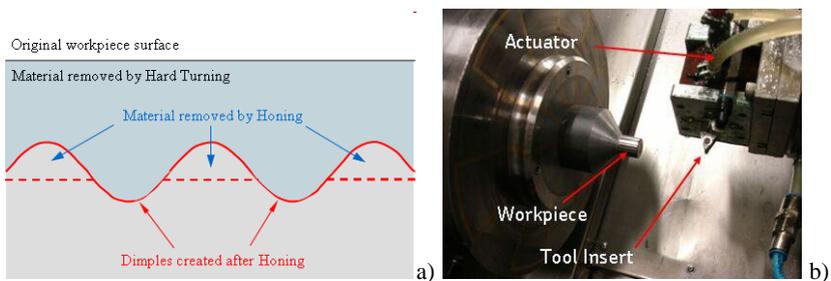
Schematic description of method b) Actuator with a cutting tool and work piece mounted in the chuck
